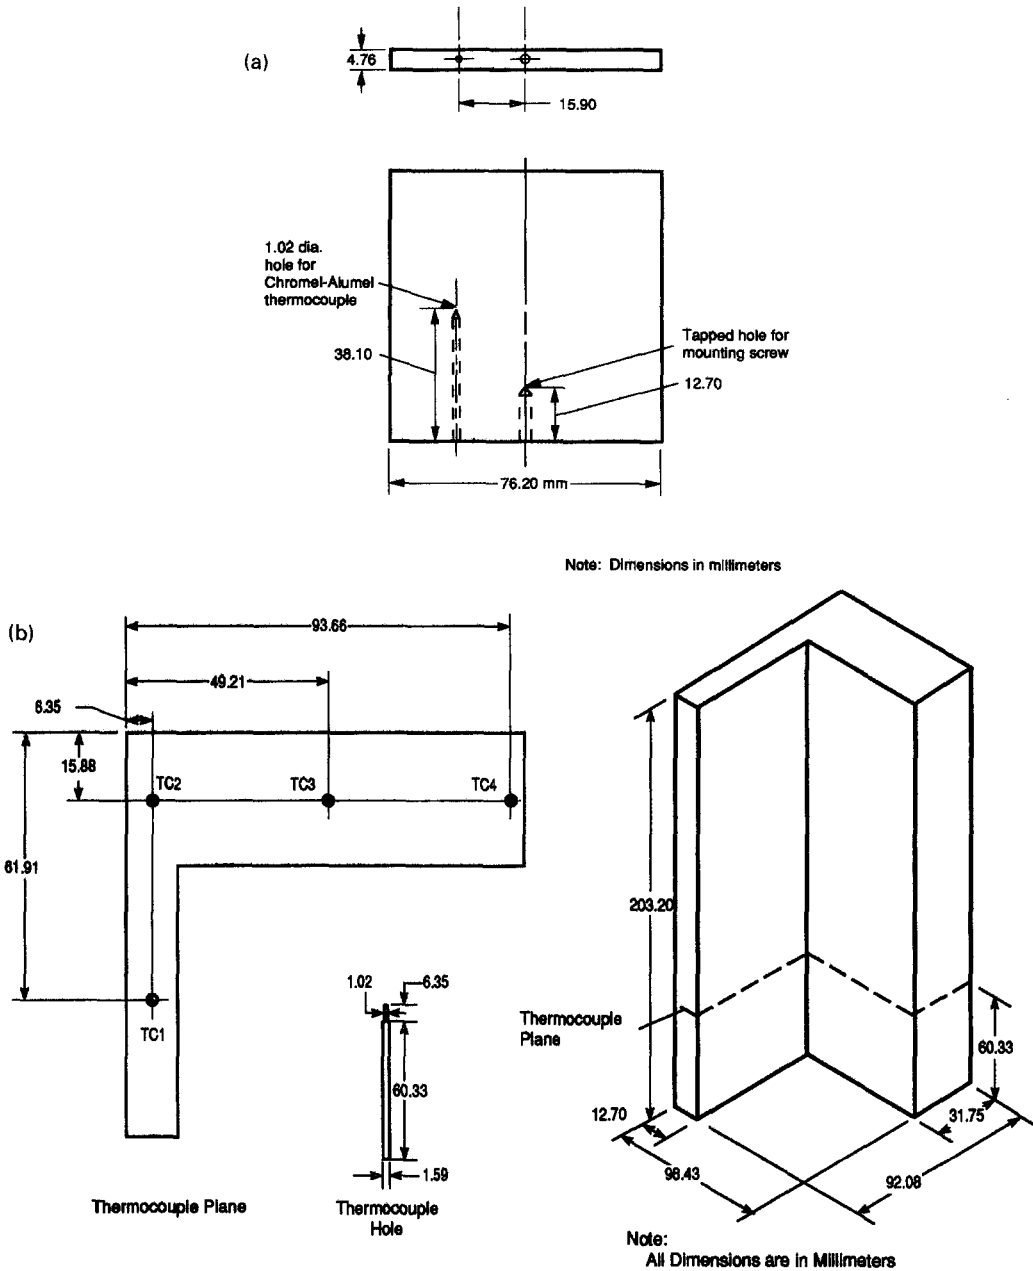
Construction of (a) square specimens and (b) L-shaped test specimen.
